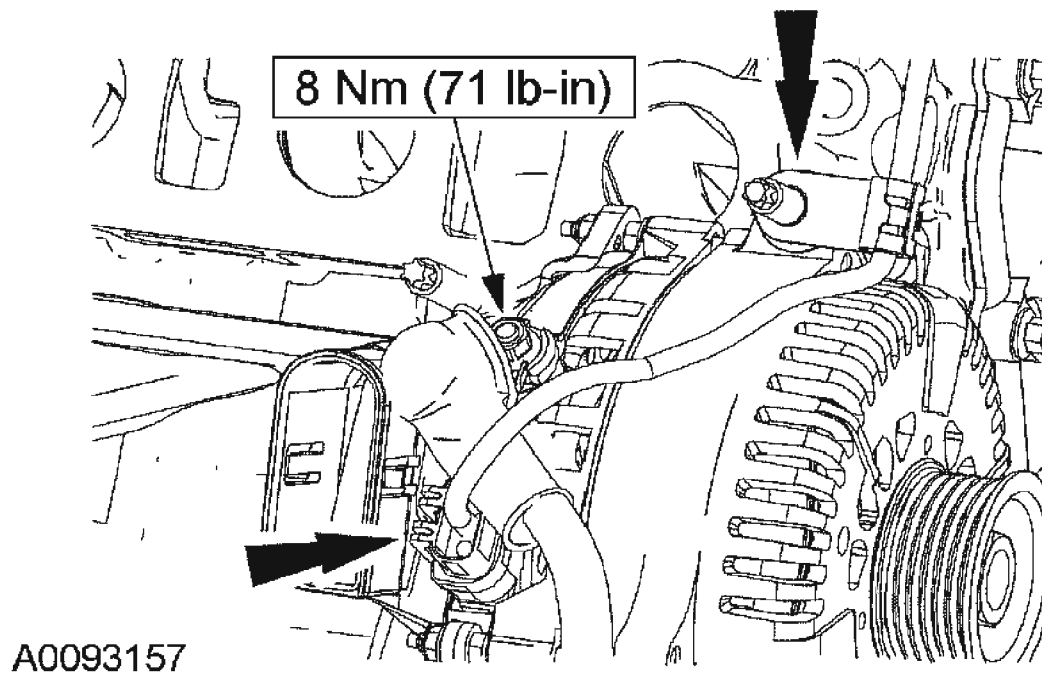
Connecting Generator Electrical Connections And Harness Retainer, Harness Retainer And Installing Nut
